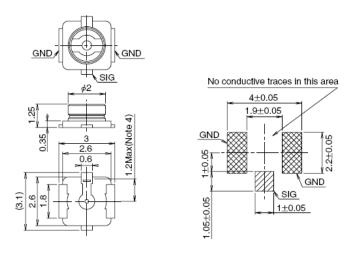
; Dimensions of the U.FL-R-SMT Connector (Unit: mm)
